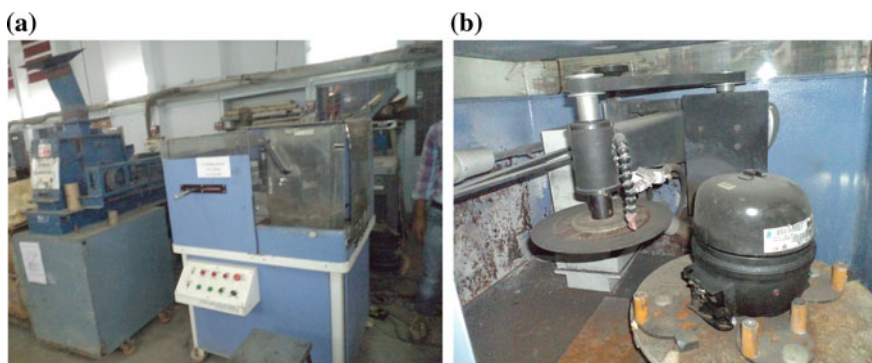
Compressor cutting machine. a Outside view, b inside view
